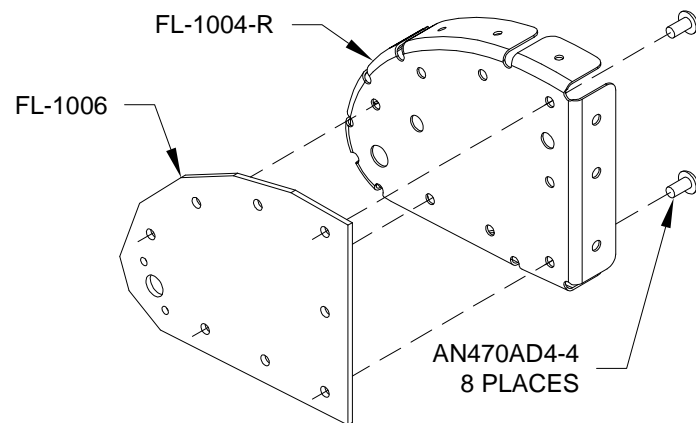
INBOARD ROD END RIB SUBASSEMBLY
